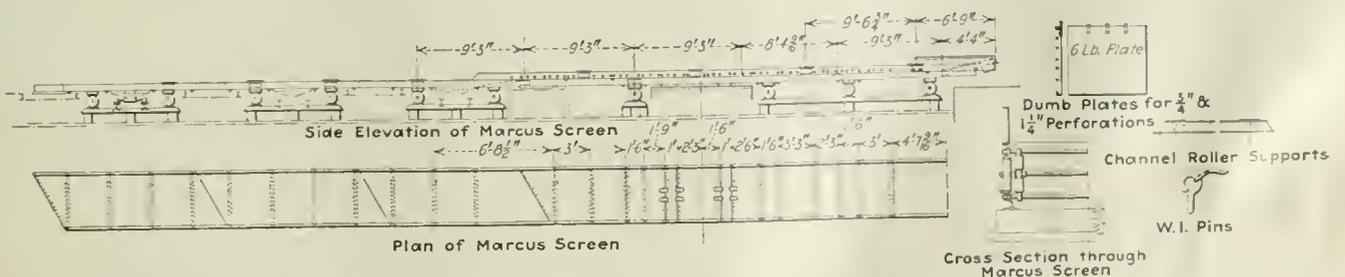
SIDE ELEVATION AND A PLAN OF SCREEN
